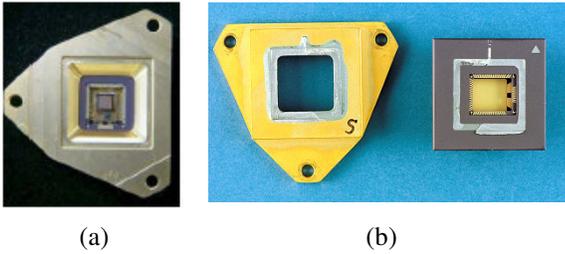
The APD, Kyocera package and mount a) Assembled view, b) mount and ceramic package
